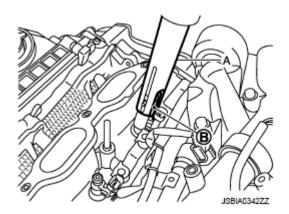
Identifying Injector Remover To Injector Connector Side Courtesy of NISSAN MOTOR CO., U.S.A.
